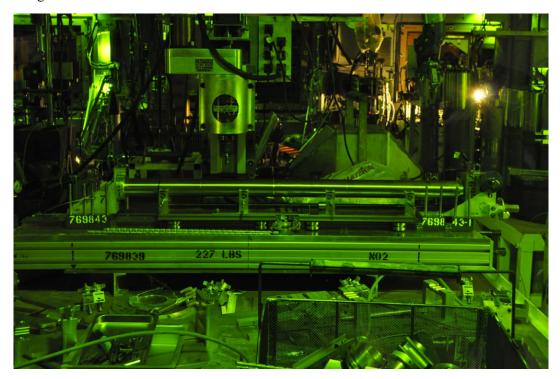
Test train installed on the mill fixture with the deburring fixture installed on the left side (denoted by item number 7, above 769843).
